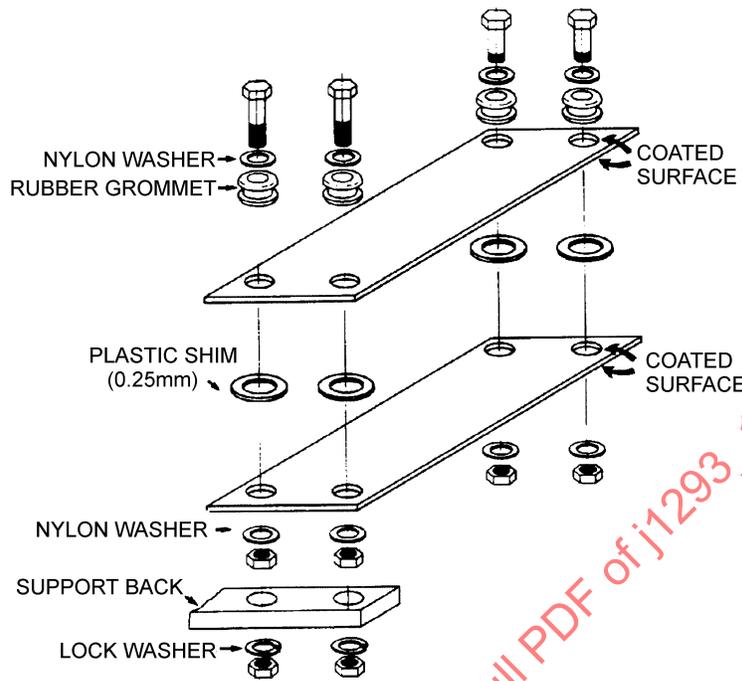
TWO-SIDED COATED STEELS COUPON ASSEMBLY
